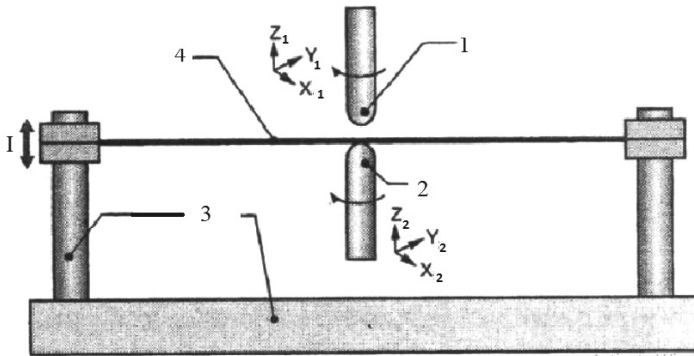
Schematic representation of incremental forming with counter tool, [16]: 1 - Main tool; 2 - Auxiliary tool; 3 – Clamping device; 4 – Raw material; I – Forming tool movement in Z-axis direction
